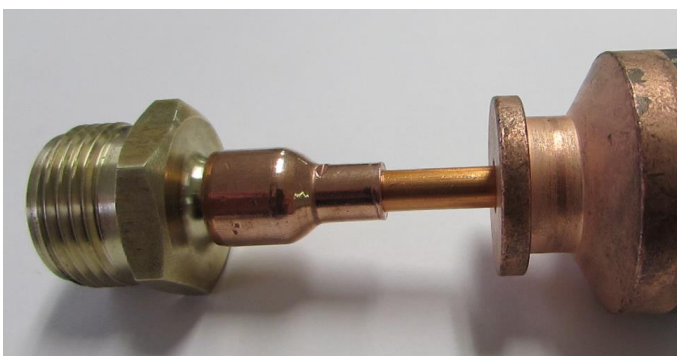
Connection parts to assemble the DTC valve to the ZF24-48K4E injection port
